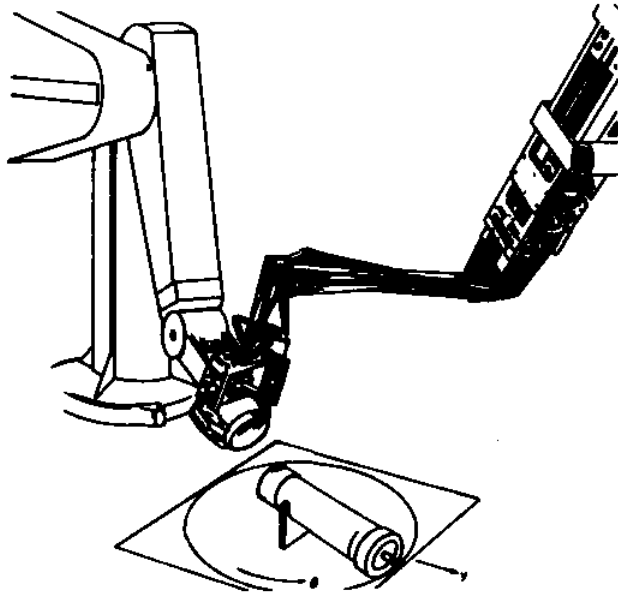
Line drawing illustrating components in Hand, Remotizer, Actuator Package, PUMA and positioning table.
